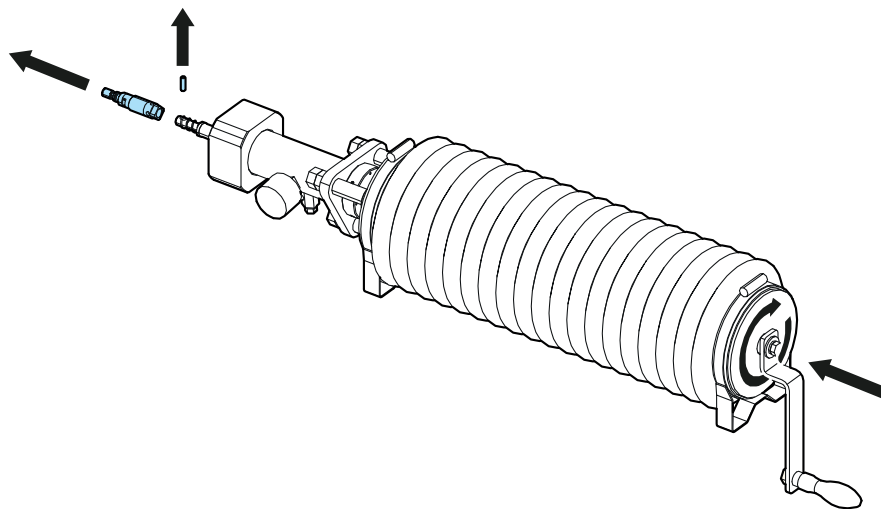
Dismounting the transducer assembly from the spindle assembly
